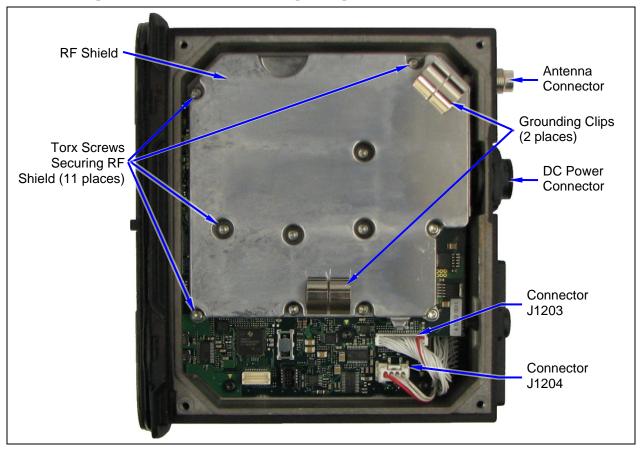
Removing the Main board (Radio Shown Without Bottom Cover)
